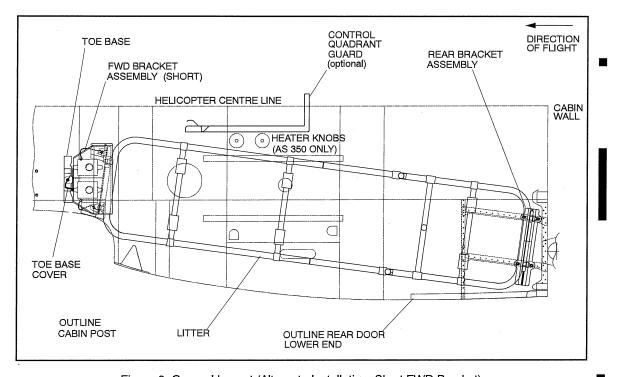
General Layout (Alternate Installation, Short FWD Bracket)
